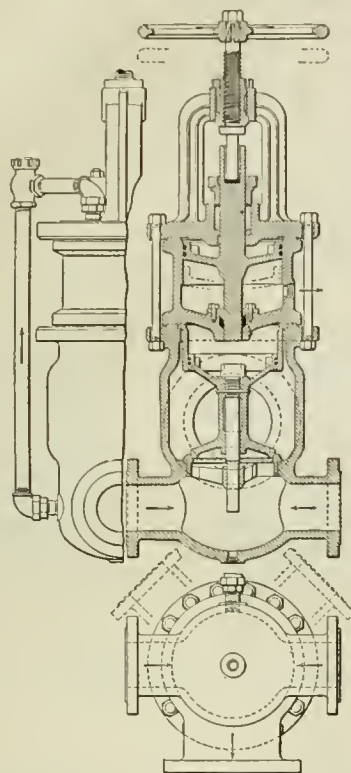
CROSS-SECTION OF AN EMERGENCY PISTON-OPERATED STEAM STOP VALVE
